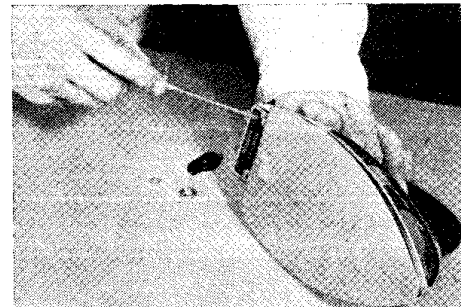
If element or thermostat needs repair, first step in removing the plated body is the taking out of two screws holding the name plate
